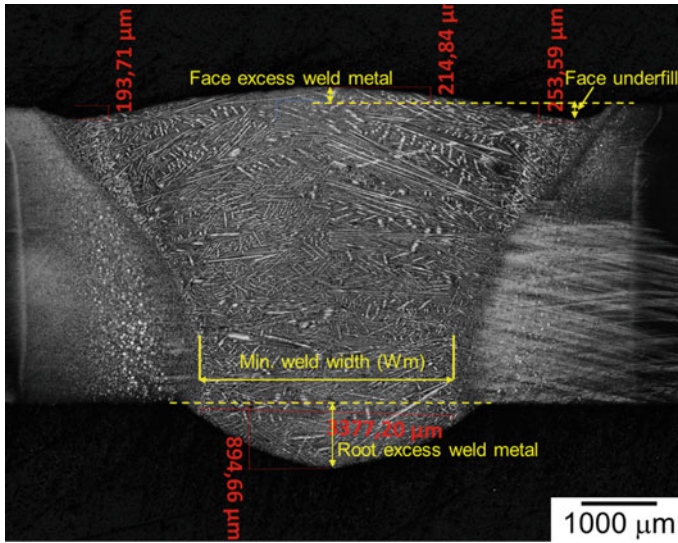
LOM image showing the example of weld bead geometry of K-TIG welded Alloy G27 and the corresponding bead geometry measurements
